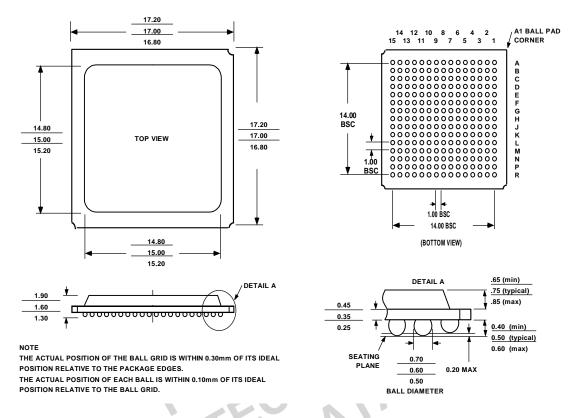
Package Dimensions Metric 17mm × 17mm, 225 ball PBGA
